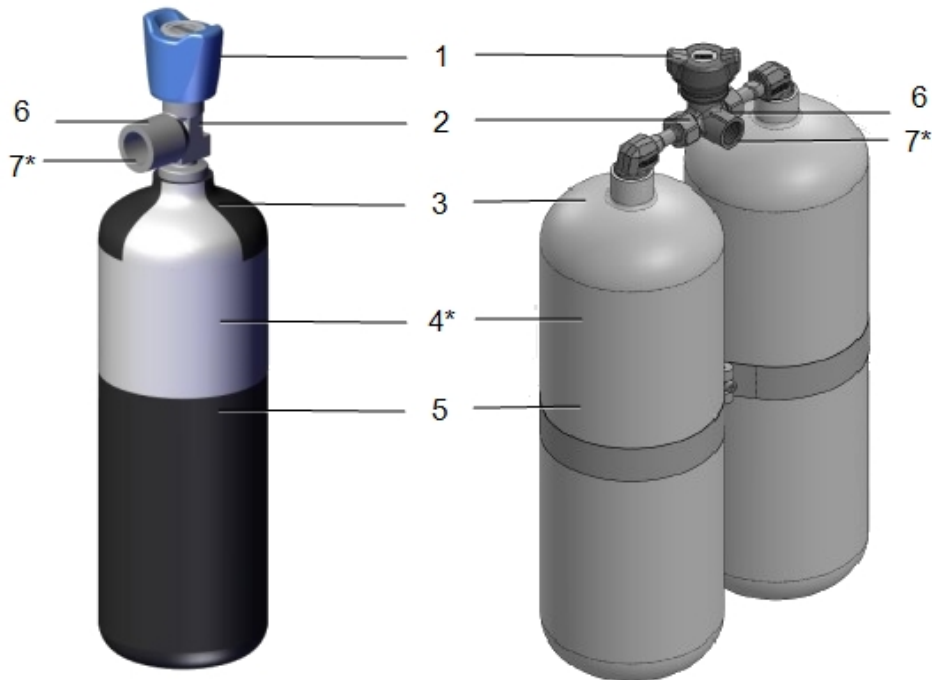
Overview composite compressed air cylinder with cylinder valve / M1 TwinPack
